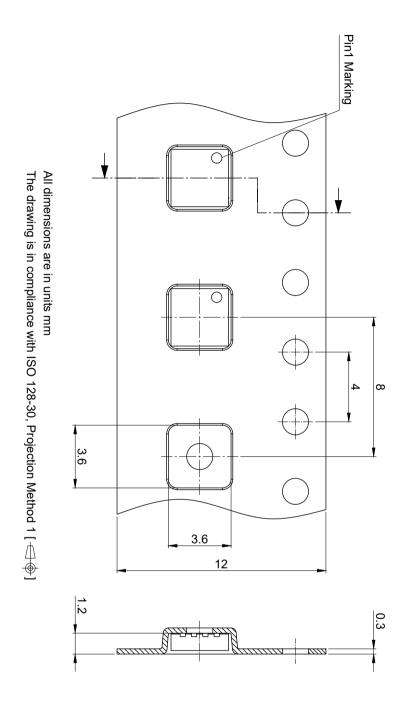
Packaging variant PG-TTFN-9, dimensions in mm
